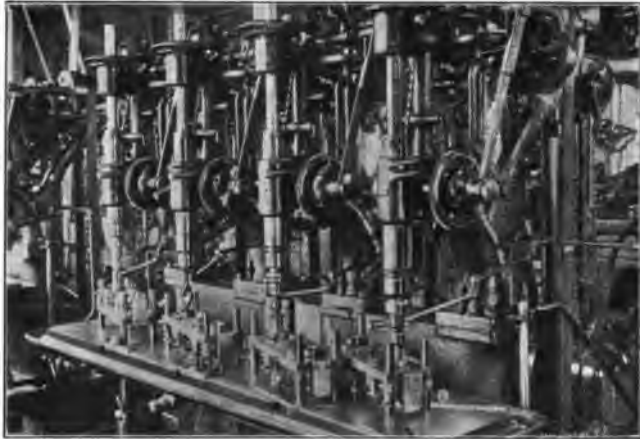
Gang Drill used in Drilling and Reaming Connecting-rod Ends
